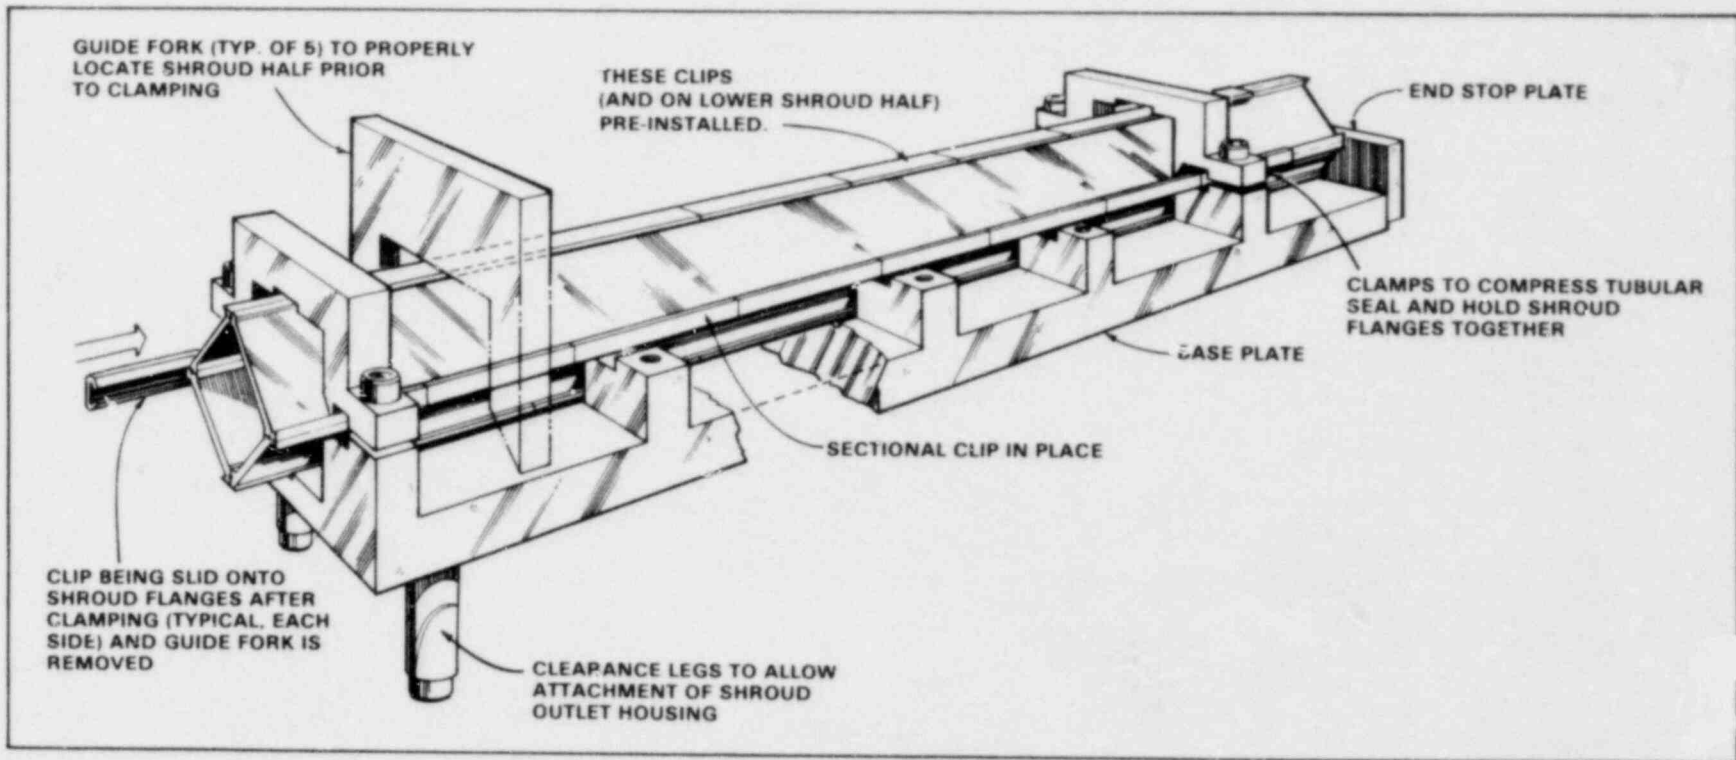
Shroud and Fuel Bundle Assembly Fixture
